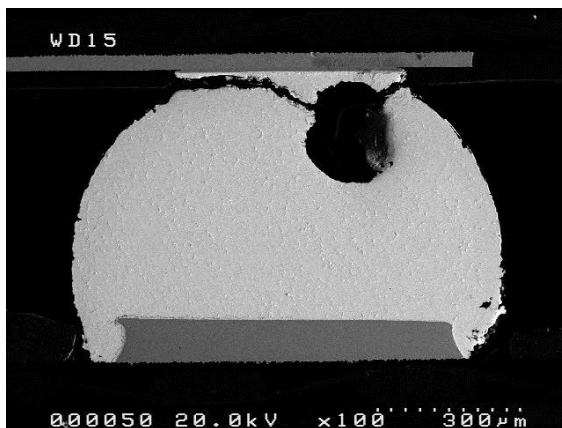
BGA with SAC305 on ENEPIG finish, 170 T_g board
